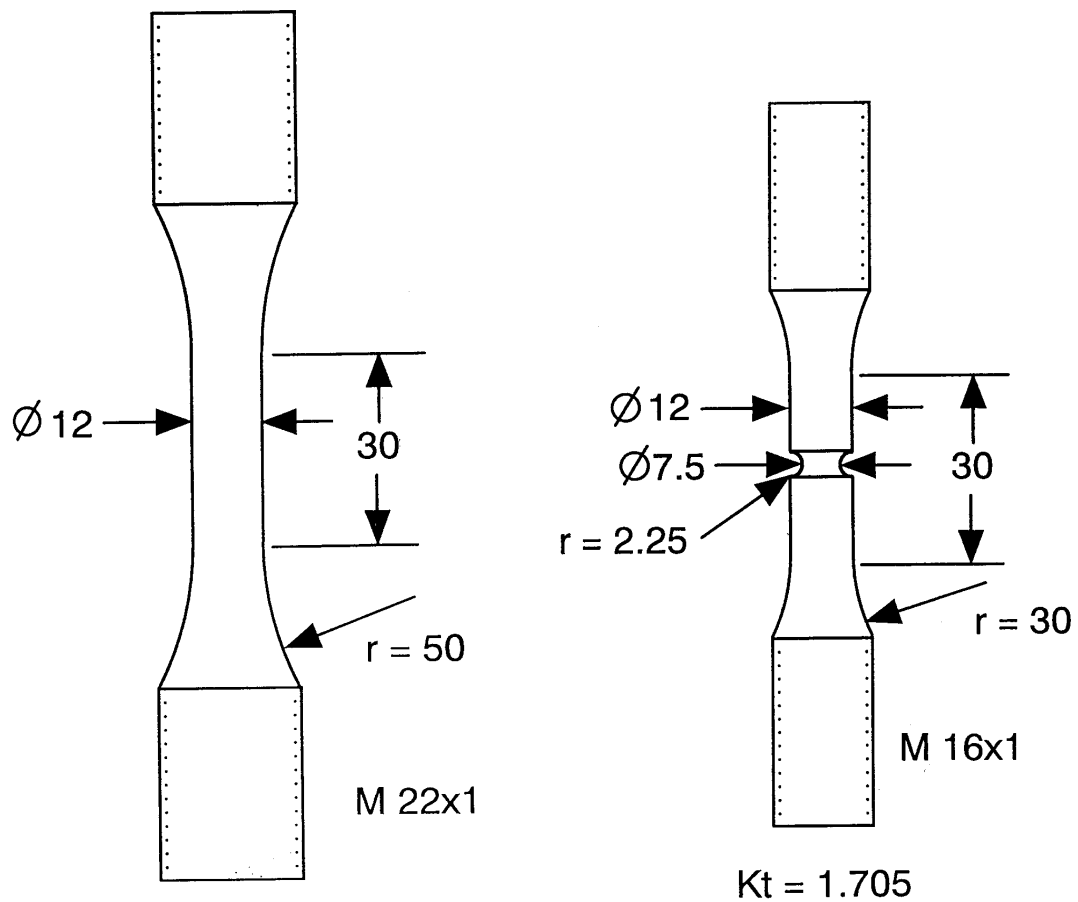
a) smooth axial fatigue specimen; b) notched axial fatigue specimen.
